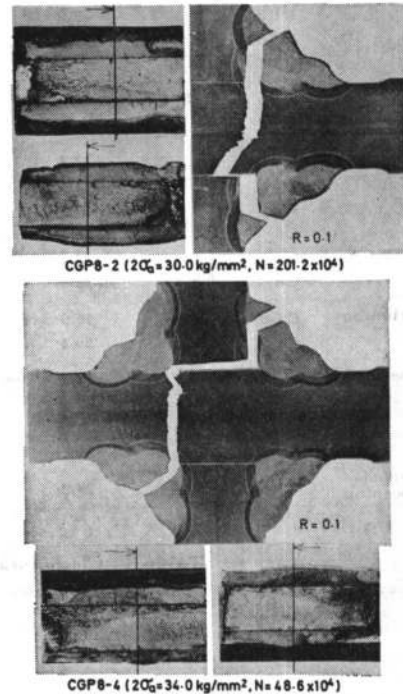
Fracture surface and macrosection showing fatigue crack initiation at the root of cruciform fillet welded joints (toe ground and peened)
